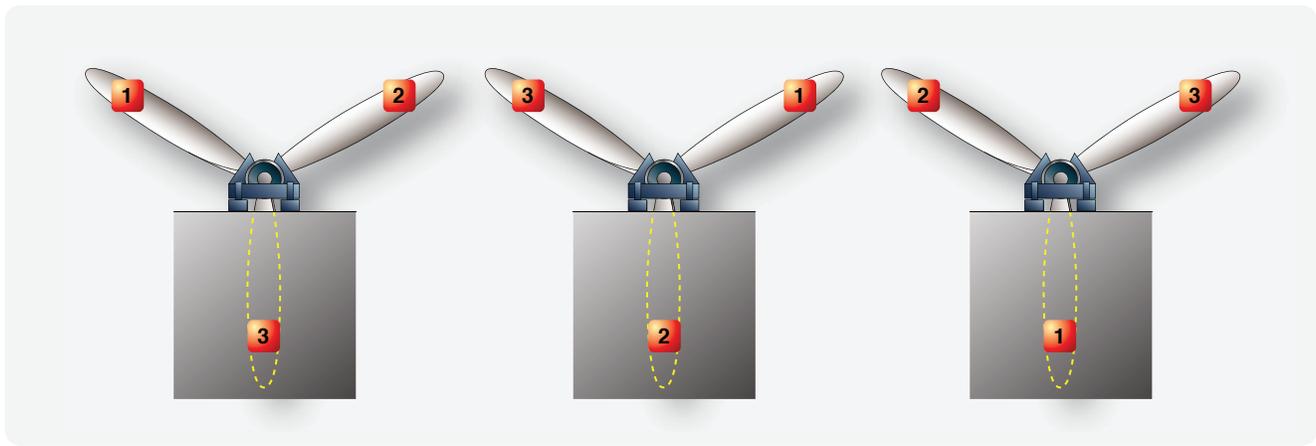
Checking three bladed propeller for static balance using knife-edge stand.
